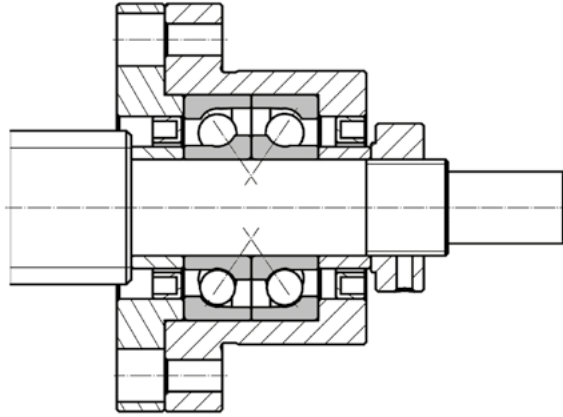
Bearing arrangement DF in fixed bearing units FK
